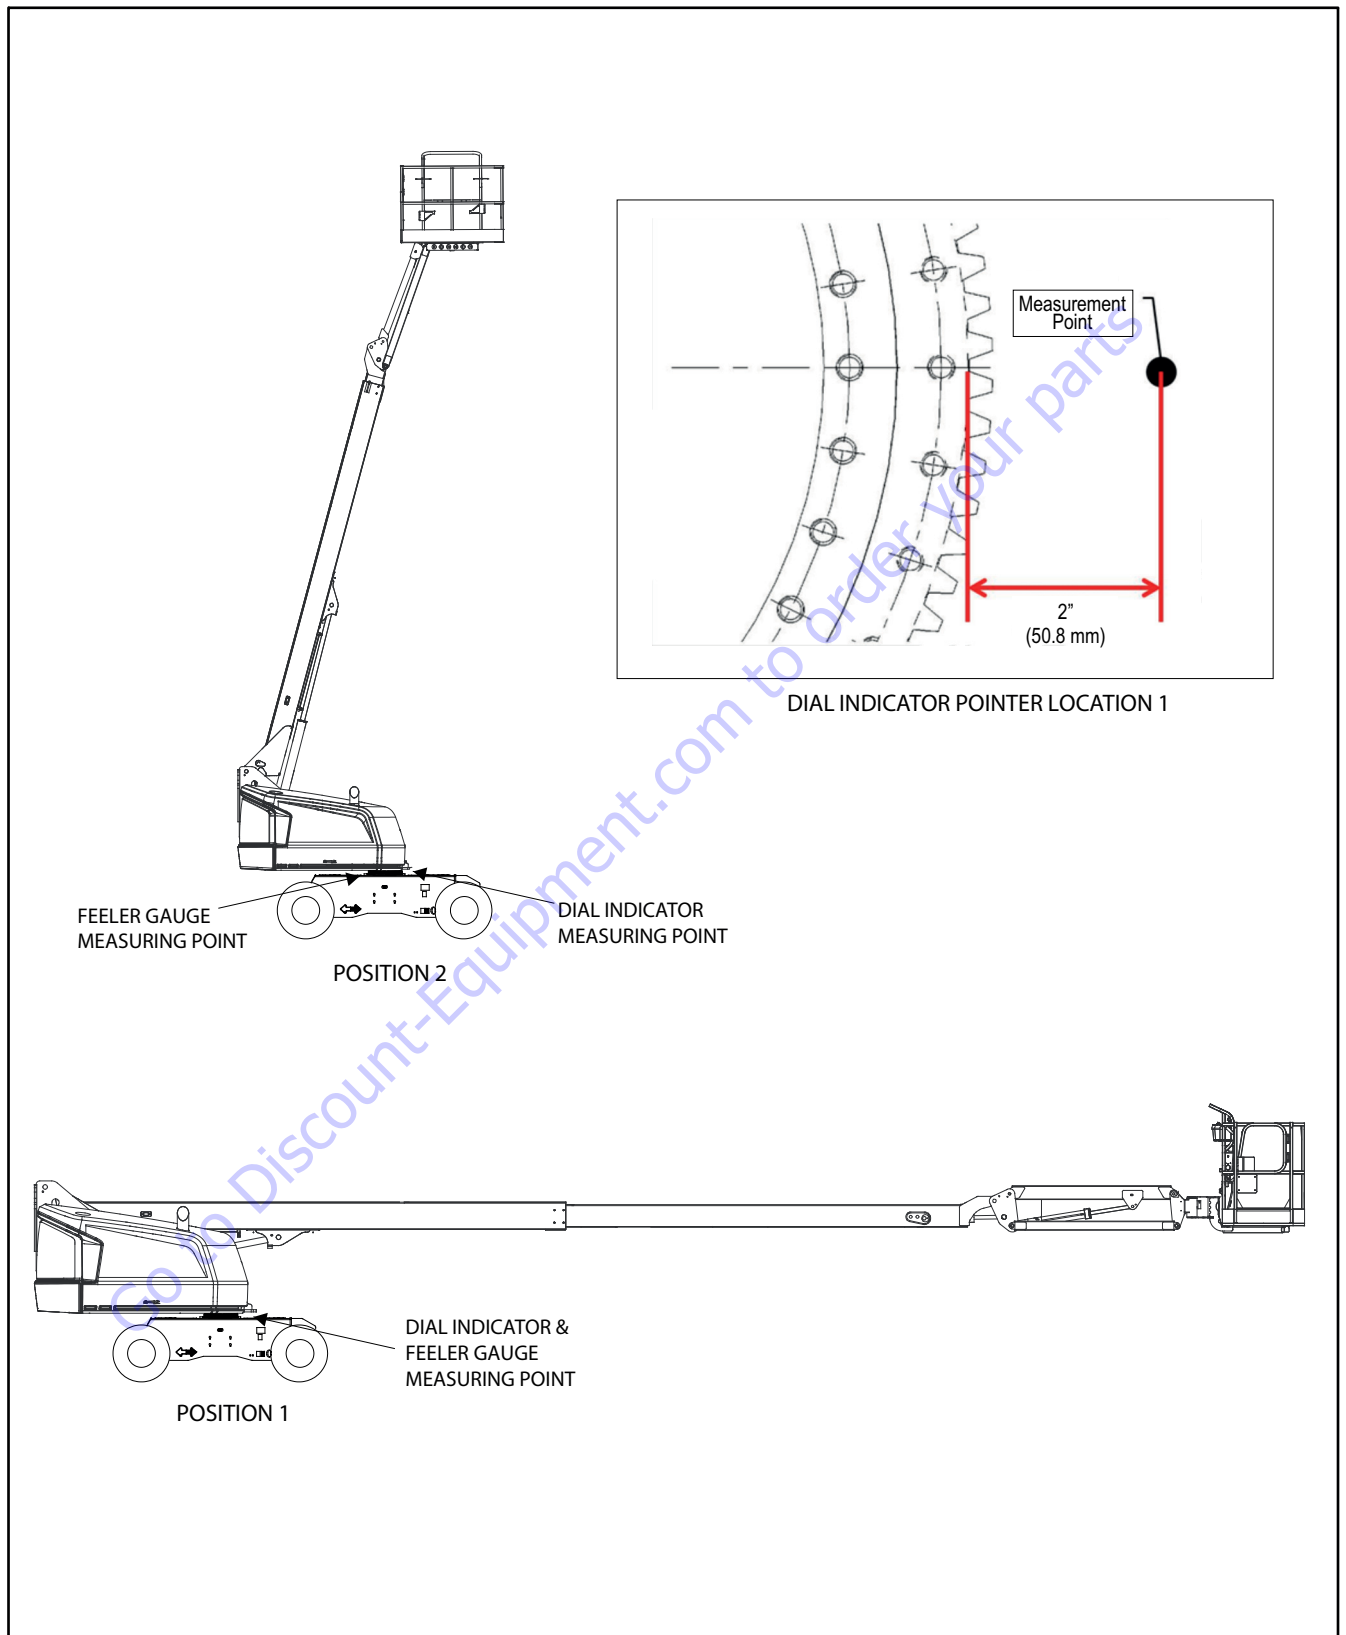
Swing Bearing Wear Tolerance
